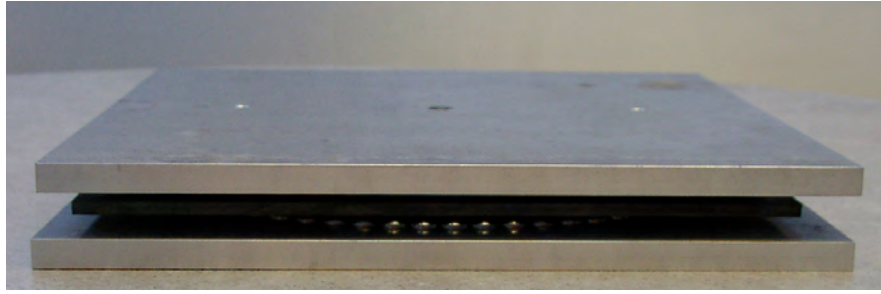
Side view of assembled 140/280 mm RoR biaxial flexure strength fixture and 305-mm-square test specimen ready for testing.
